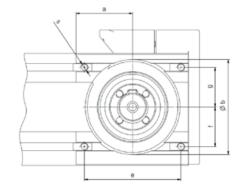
Dimensions plug-in shaft and mounting dimensions
